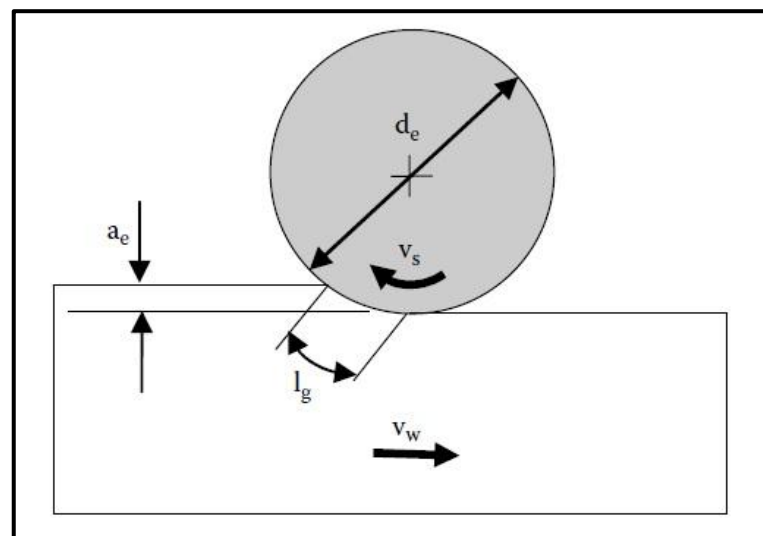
Wheel speed, work speed, depth of cut, equivalent grinding wheel diameter, and geometric contact length in grinding
